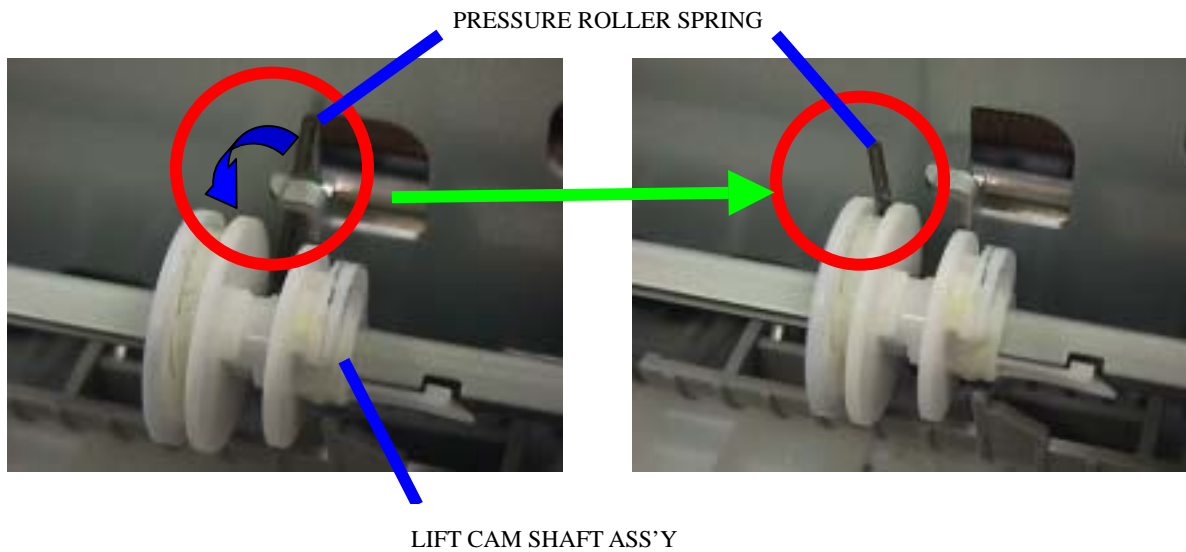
Positioning in LIFT CAM SHAFT ASS'Y adjustment 1
